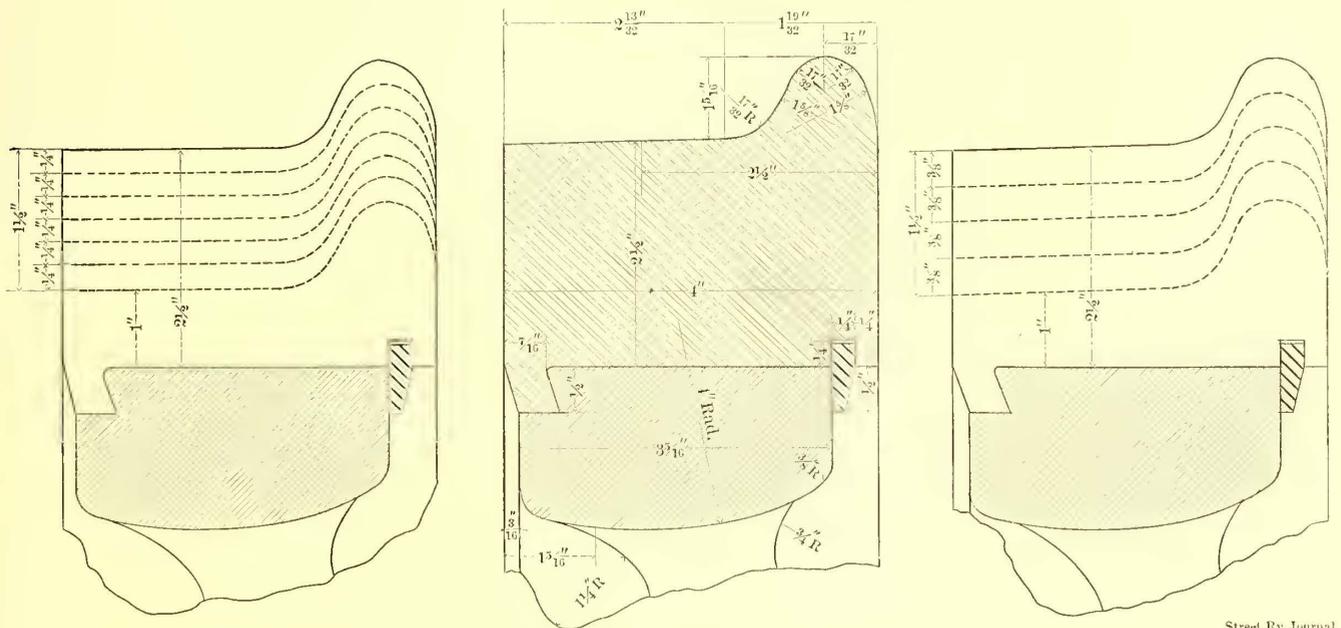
DIAGRAM SHOWING SECTION OF TYPICAL NEW TIRE AND SECTIONS AFTER TURNING DOWN
